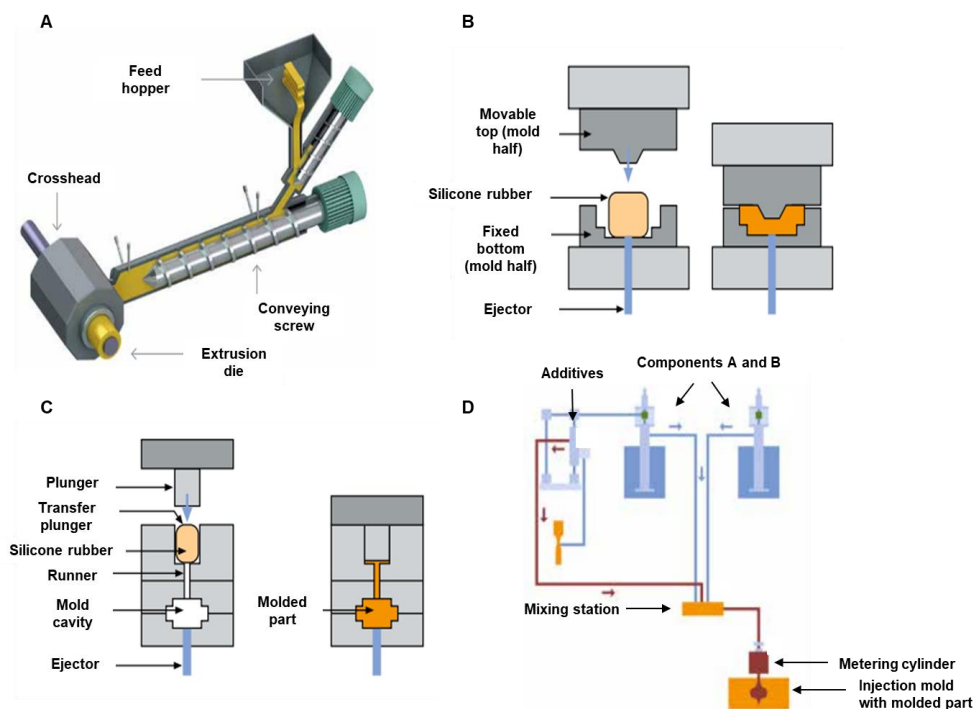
Silicone elastomer processing by (A) extrusion, (B) compression molding, (C) transfer molding, (D) injection molding.^{32,33}
